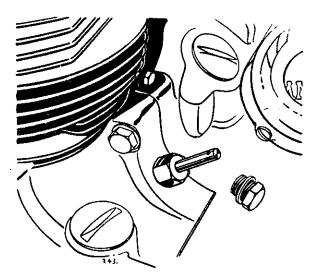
FIG. C. T.D.C. LOCATION TOOL D571/2 IN POSITION (FROM ENGINE No. H35987)
